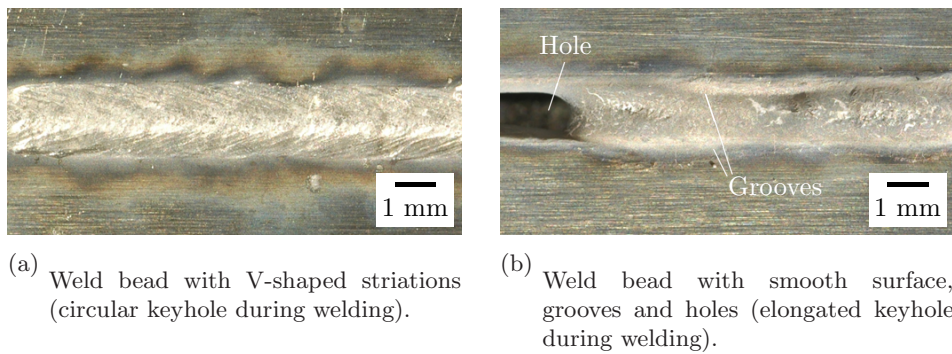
The appearance of top surfaces of weld beads obtained, with different keyhole shapes during welding (1.1 mm AA5182 sheets).
